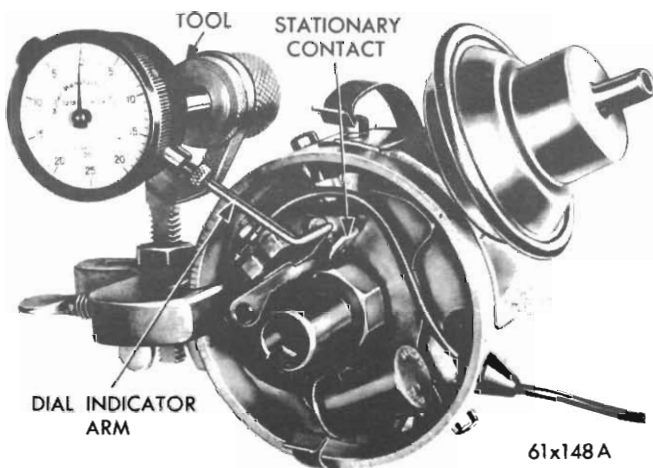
Adjusting contact clearance with indicator (typical view)
